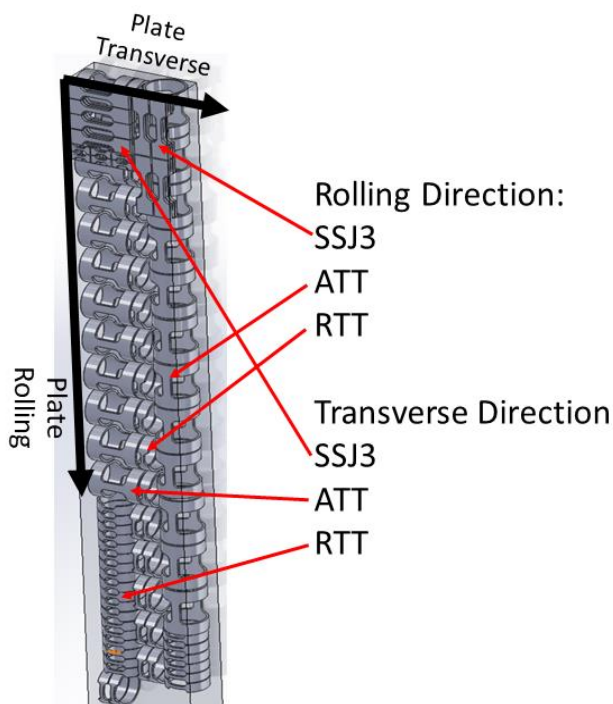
Machining schema for the ATT, RTT, and SSJ3 specimens that were manufactured out of Zircaloy-4 plate.
